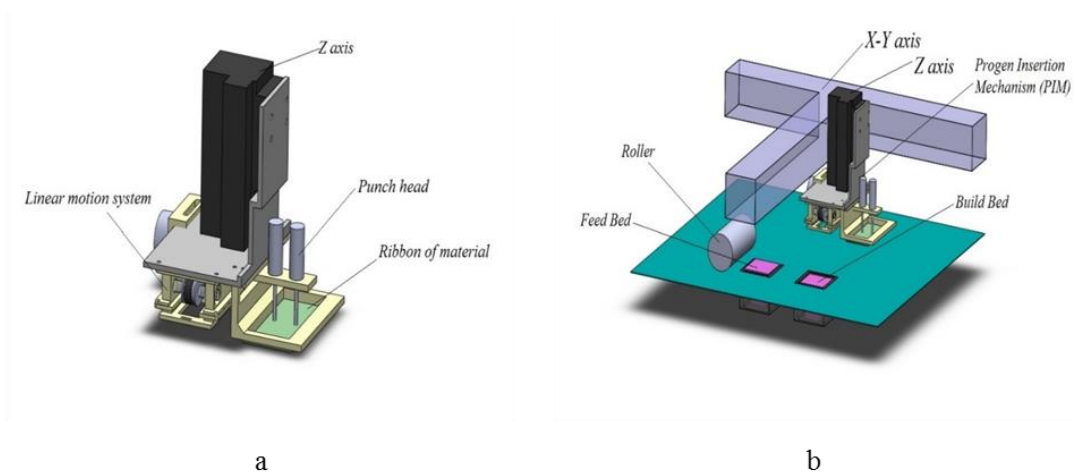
The main mechanical components of PIM (a), and assembly of it on the multi-scale porous 3D printer's gantry robot [21]
